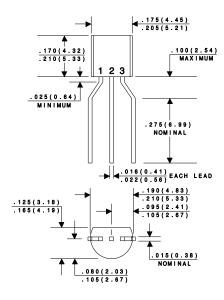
PHYSICAL DIMENSIONS ALL DIMENSIONS IN INCHES (mm).
